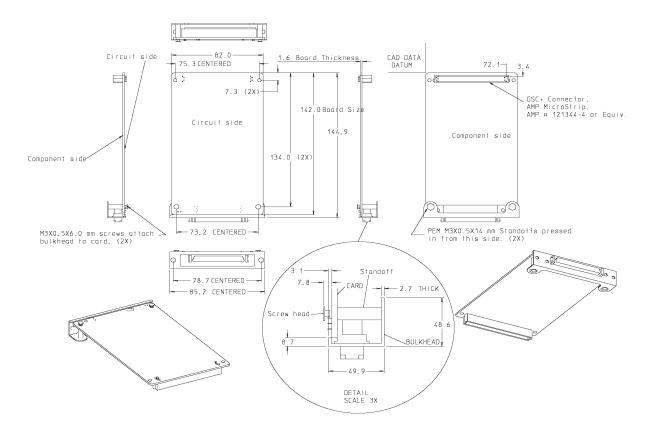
shows the dimensions of a GSC+ accessory card.
